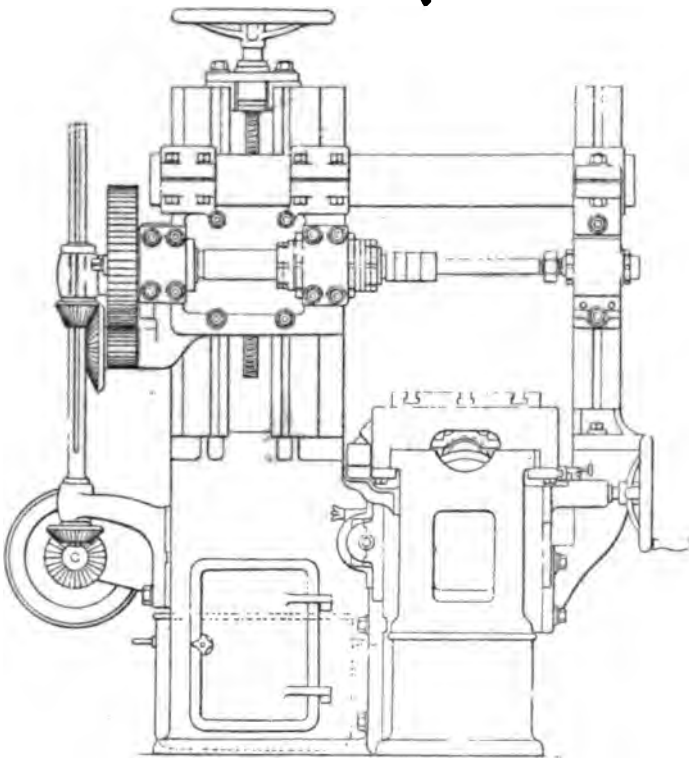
Lincoln Miller. (J. E. Reinecker.)
